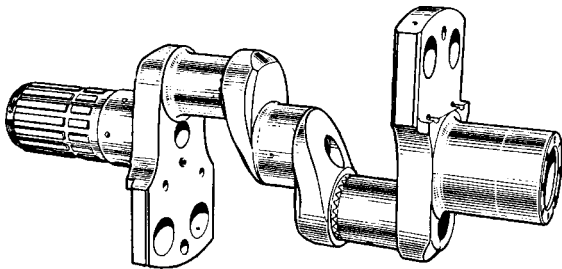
"C" series Crankshaft (Pratt & Whitney)
